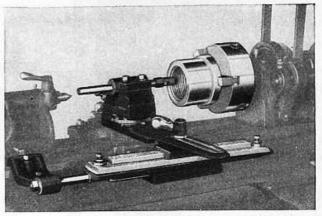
Cutting an Internal Tapered Thread on 9-inch Lathe, Using Taper Attachment
